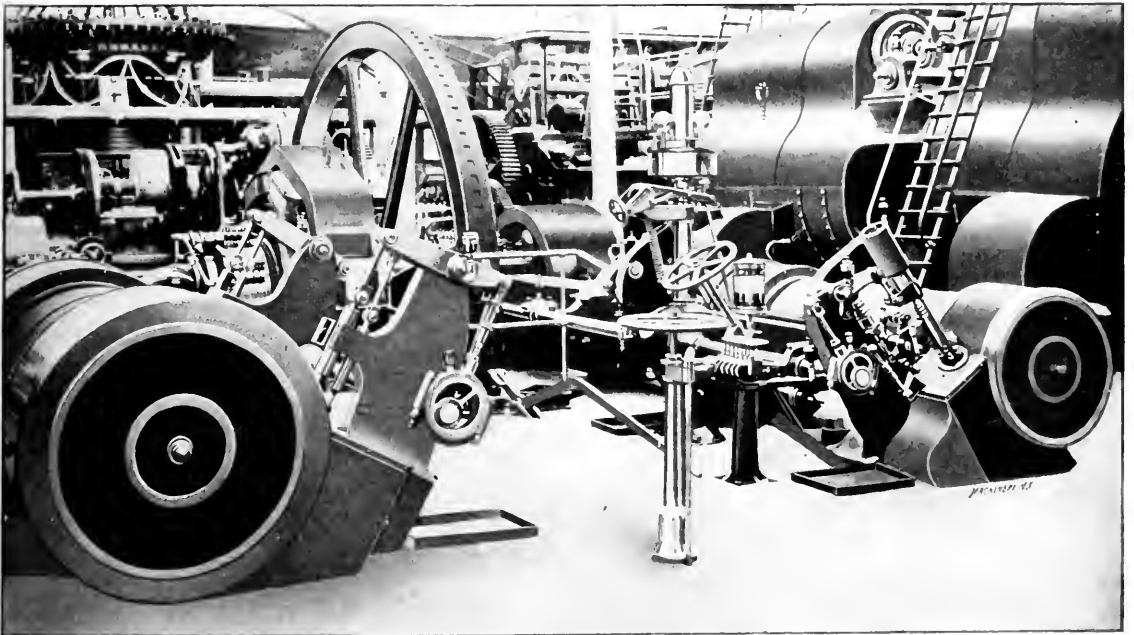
Compound Engine, Jacketed, and with Heated Pistons. Built by John Cockerill, Belgium.
